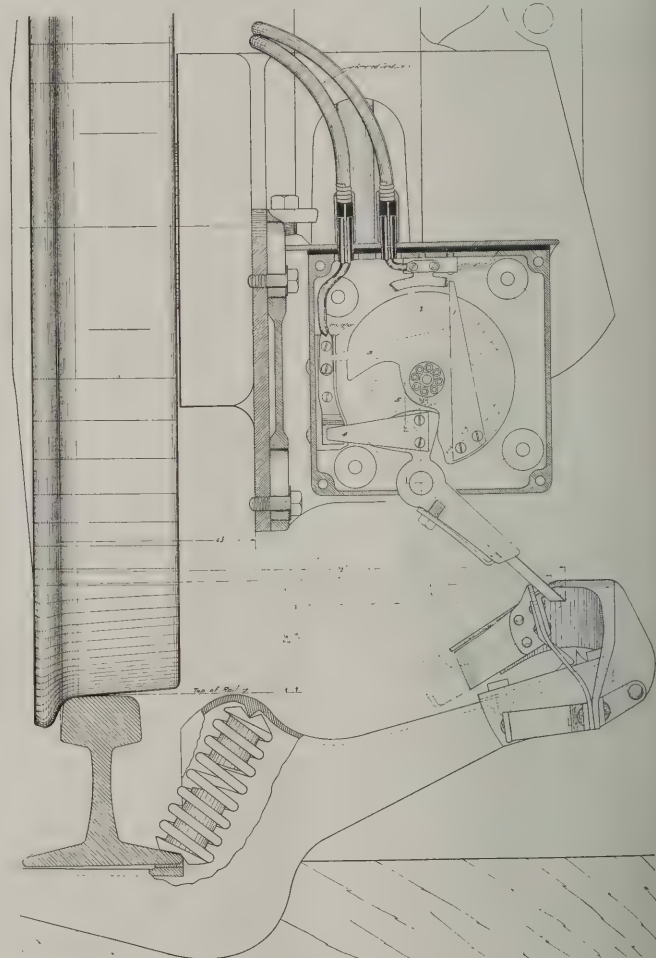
Line Drawing of Latest Type Circuit Breaker and Shoe
